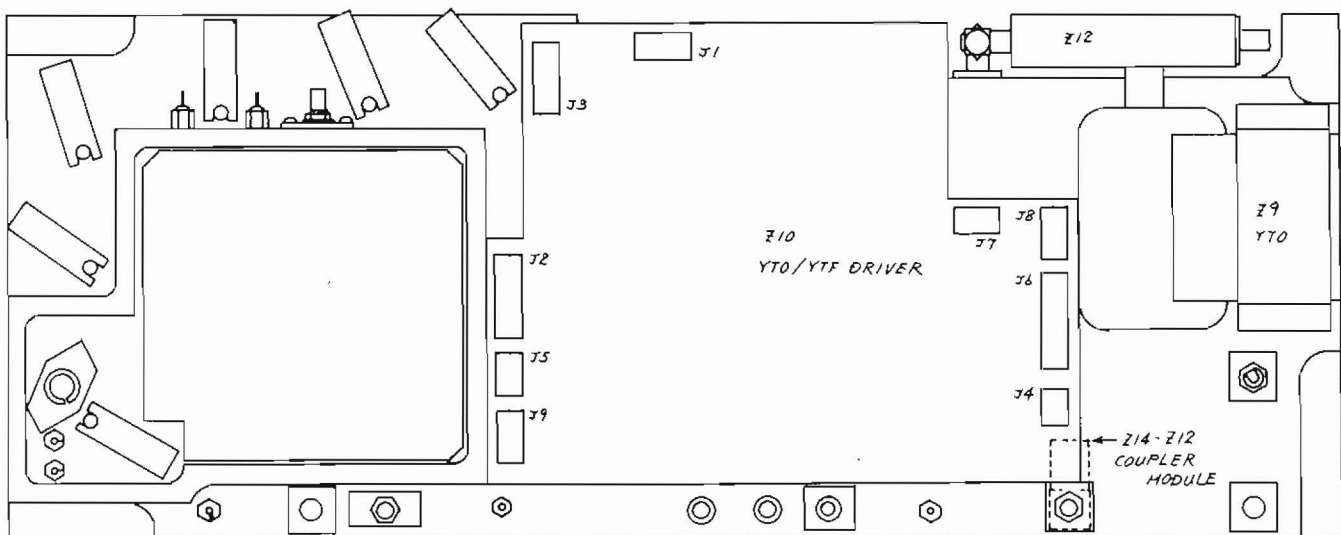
Z9, Z10, and Z14-Z12 Parts Layout
